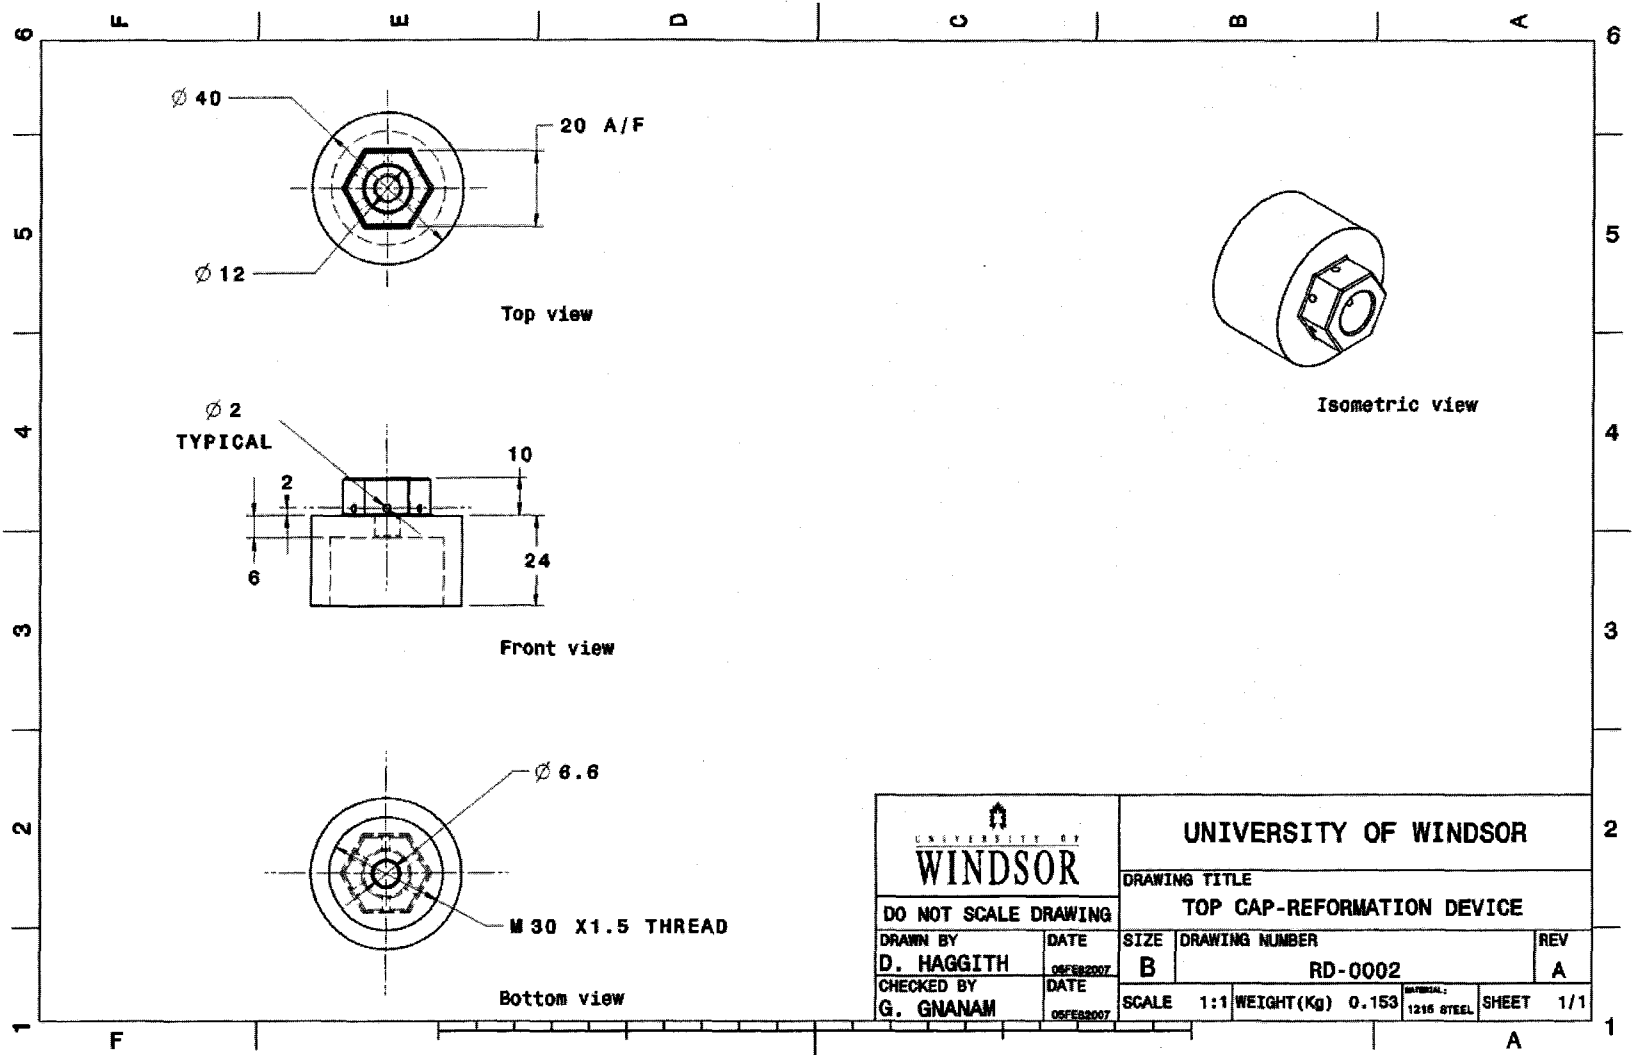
Top cap – Item 3 in assembly drawing (first proto-type).
